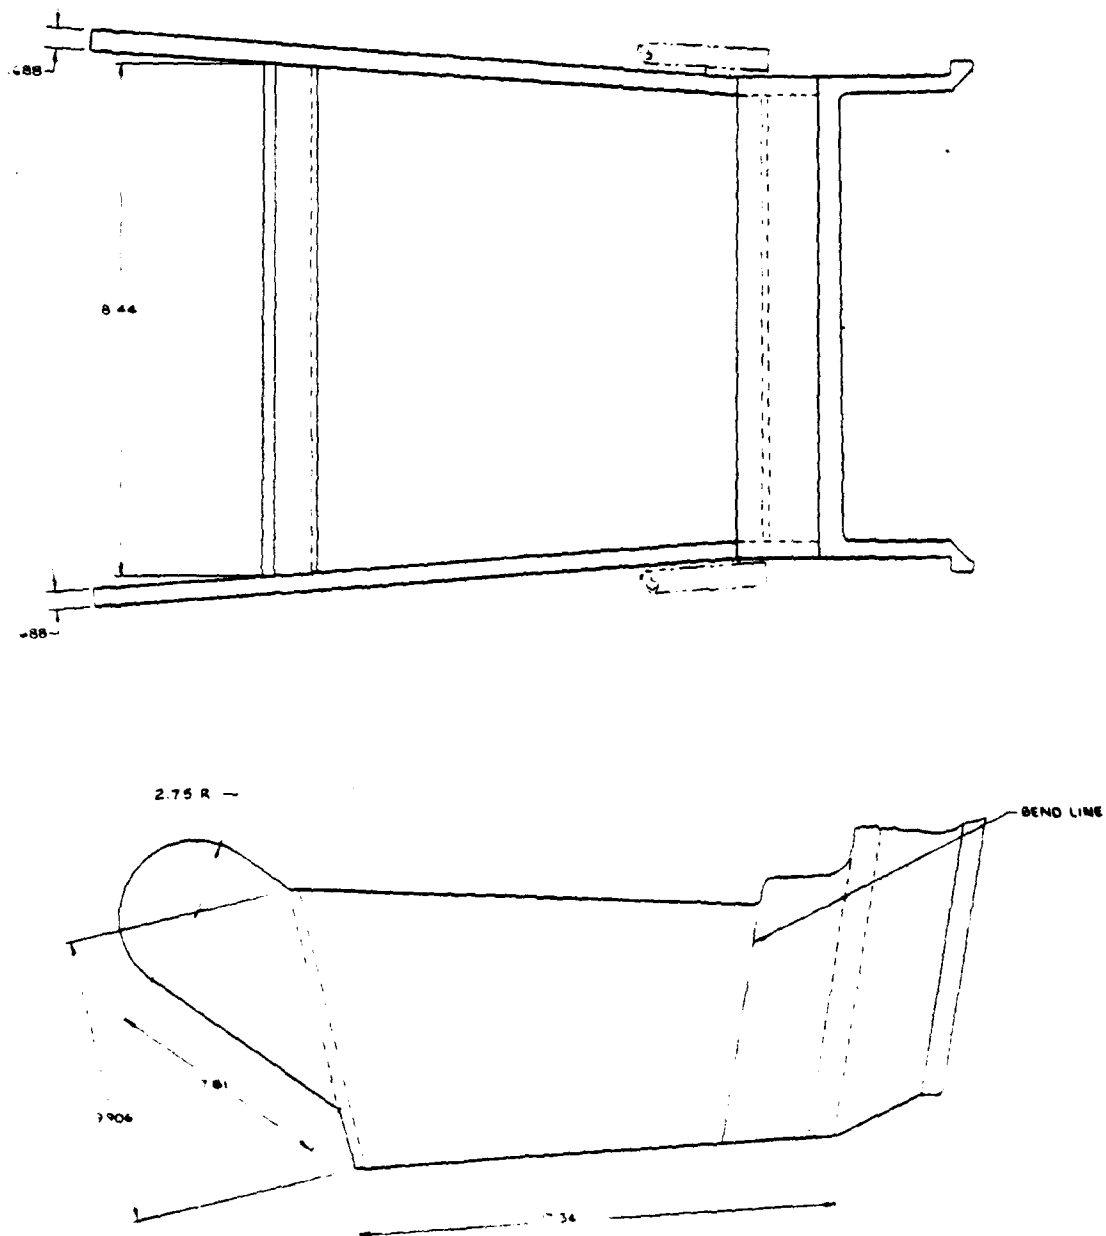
Dimensionalized Drawing of MPES Seat Structure
